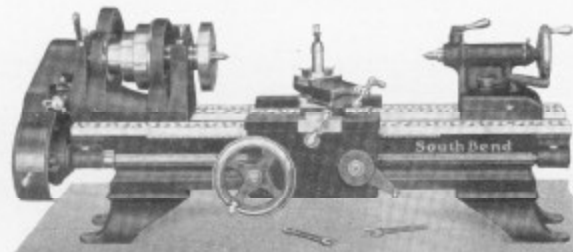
9-inch Junior, Back Geared, Screw Cutting Lathe
